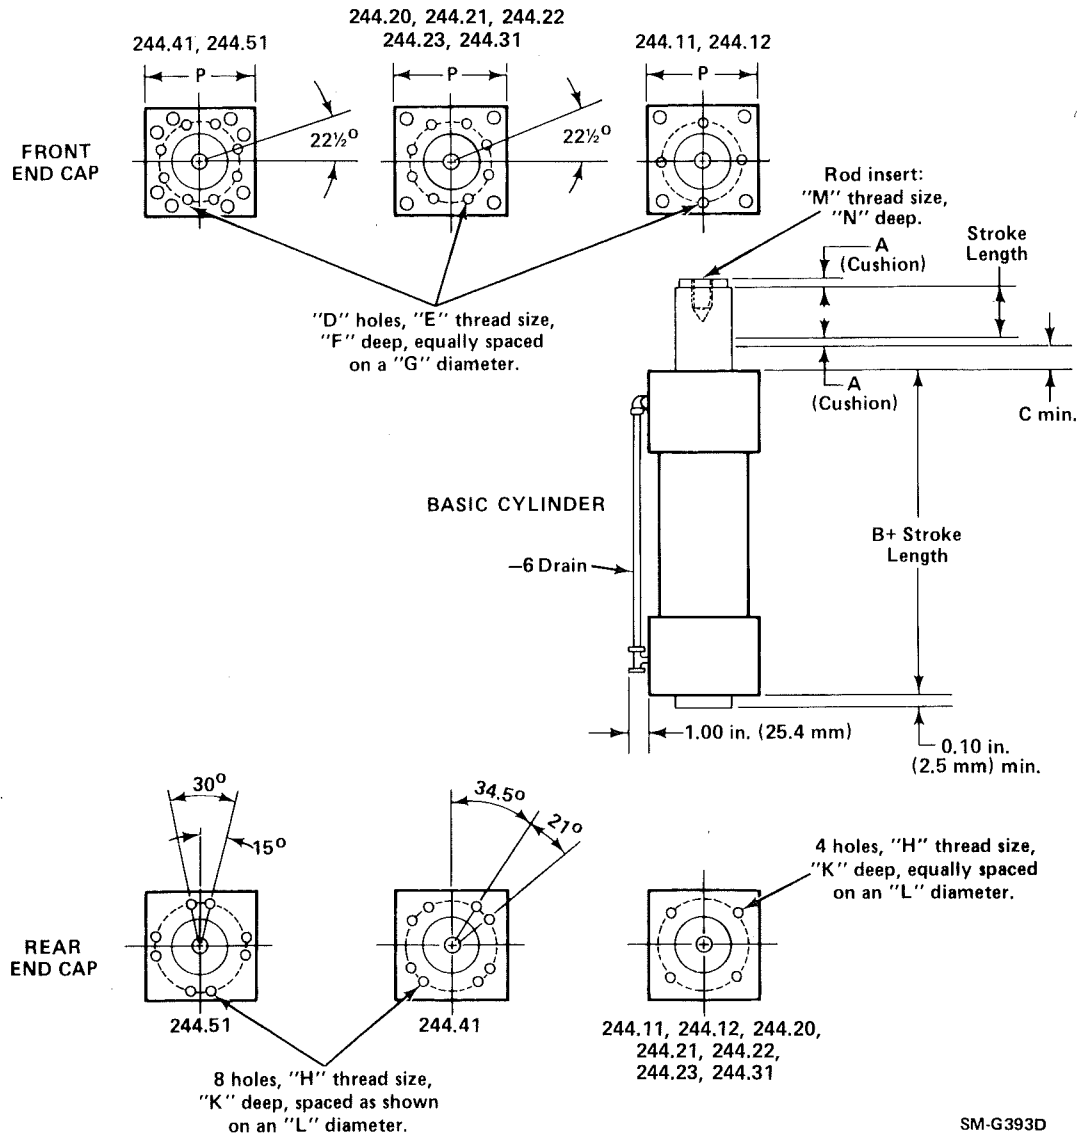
Series 244 Actuator Basic Cylinder Dimensional Drawing
